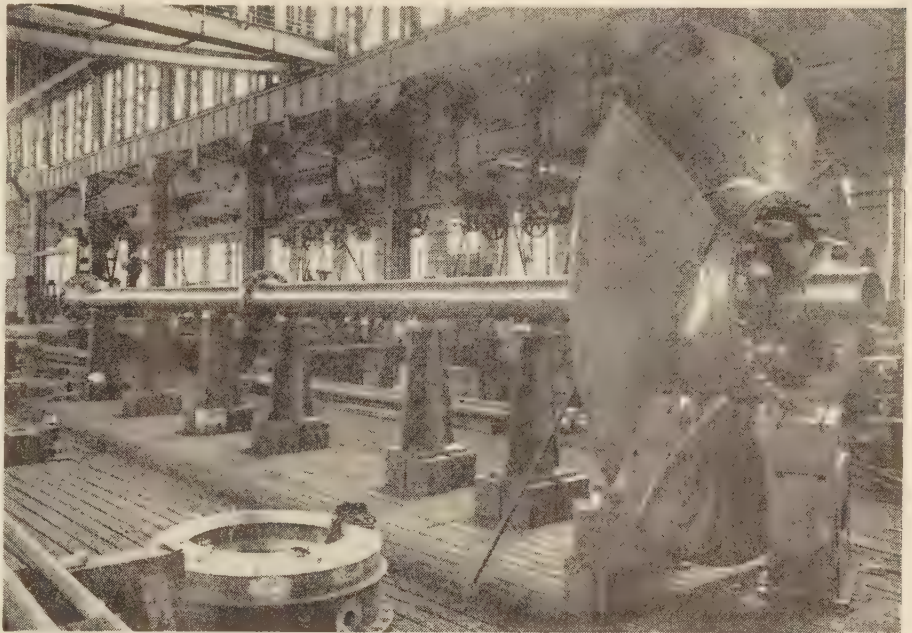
SHOP VIEW OF TRAICAO UNIT IMPELLER-AND-SHAFT ASSEMBLY
